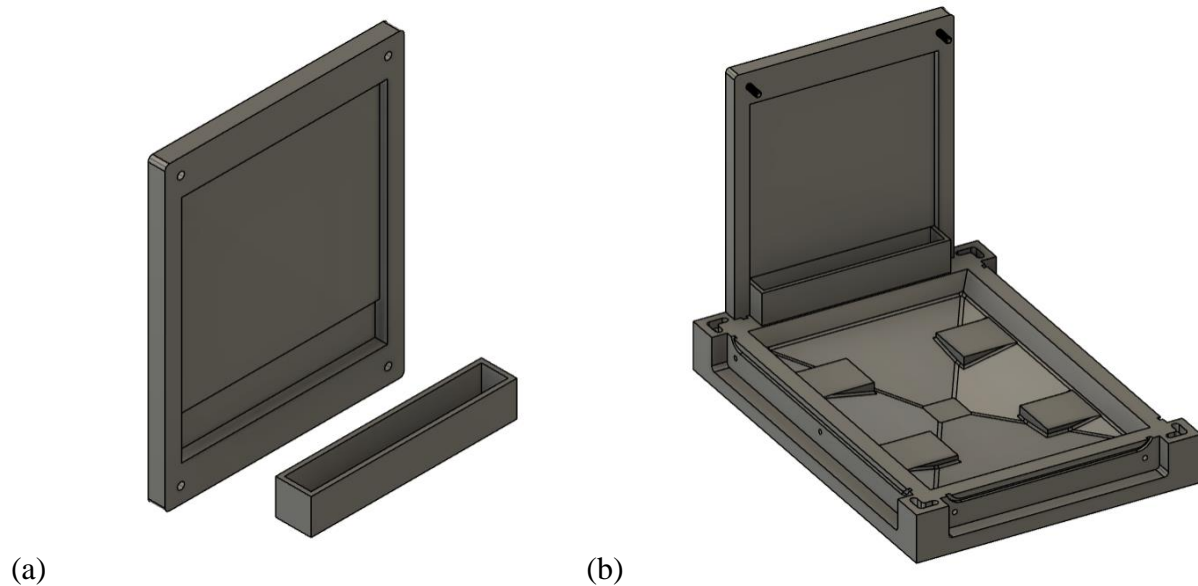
Exploded view showing the enclosure's front and back side components.
